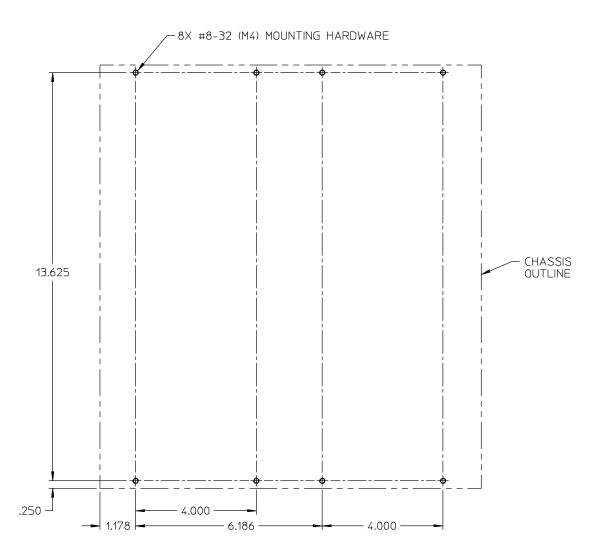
Mounting Template of MicroNet 6 Slot I/O Chassis
